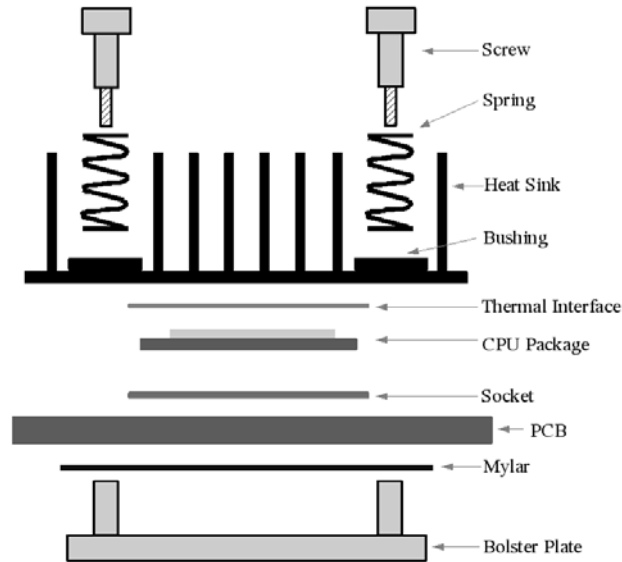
Illustration of the load assembly components used for the experiment. The socket is compressed between the LGA package and PCB pads
